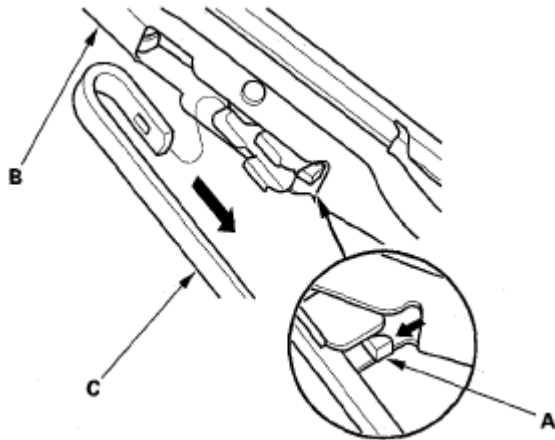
Pressing And Hold Tab And Slide Wiper Blade
